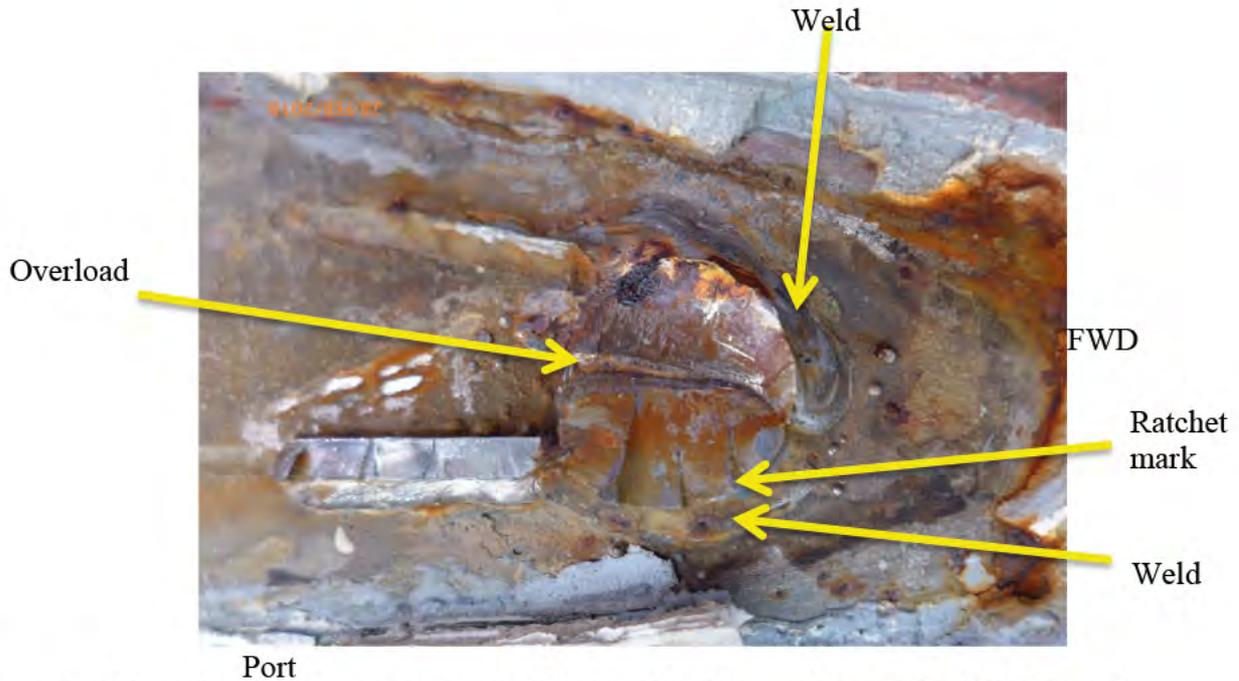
Plan view of the remnants of Rod 1, the forward most keel fixing point.
